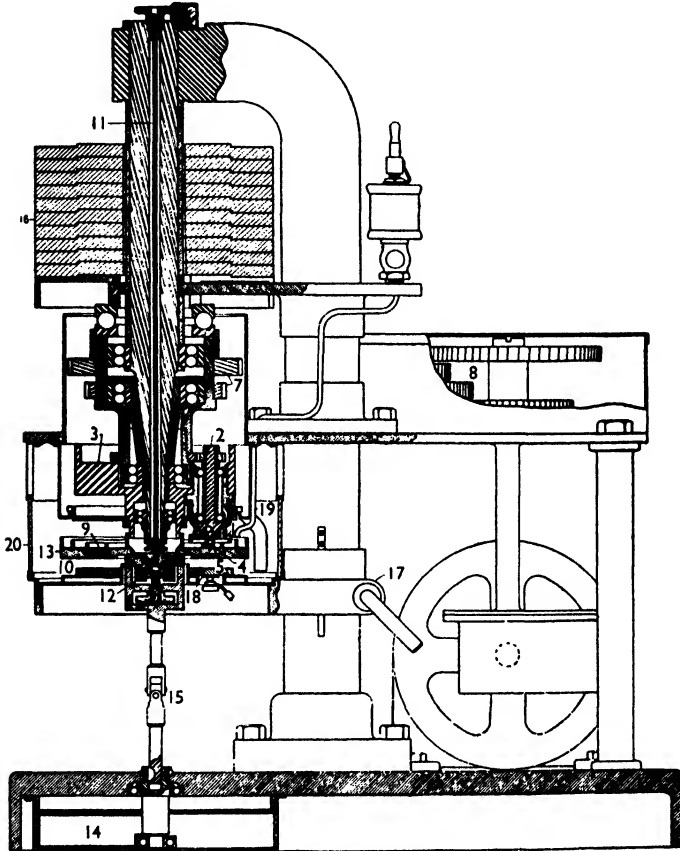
Cross-Section of Kinetic Oiliness Testing Machine, Model B
